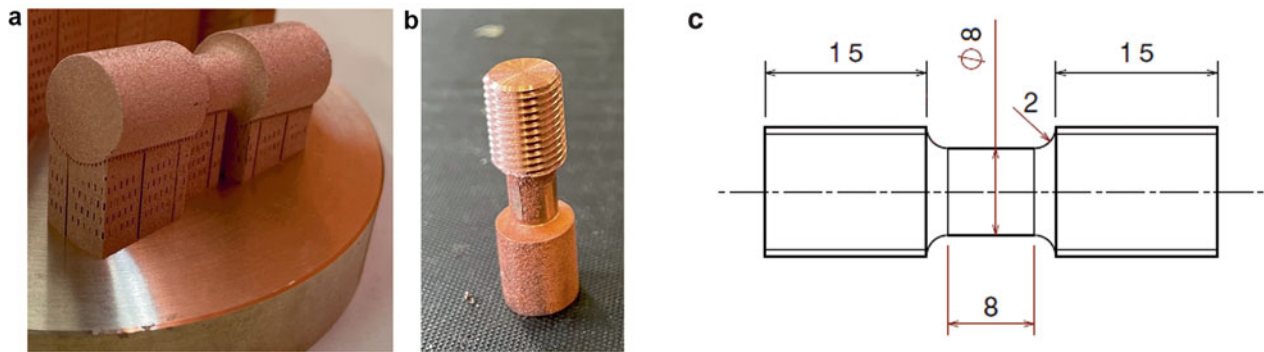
Manufactured samples: (a) raw bar with supports, (b) sample partially machined at the lathe, (c) sample dimensions
